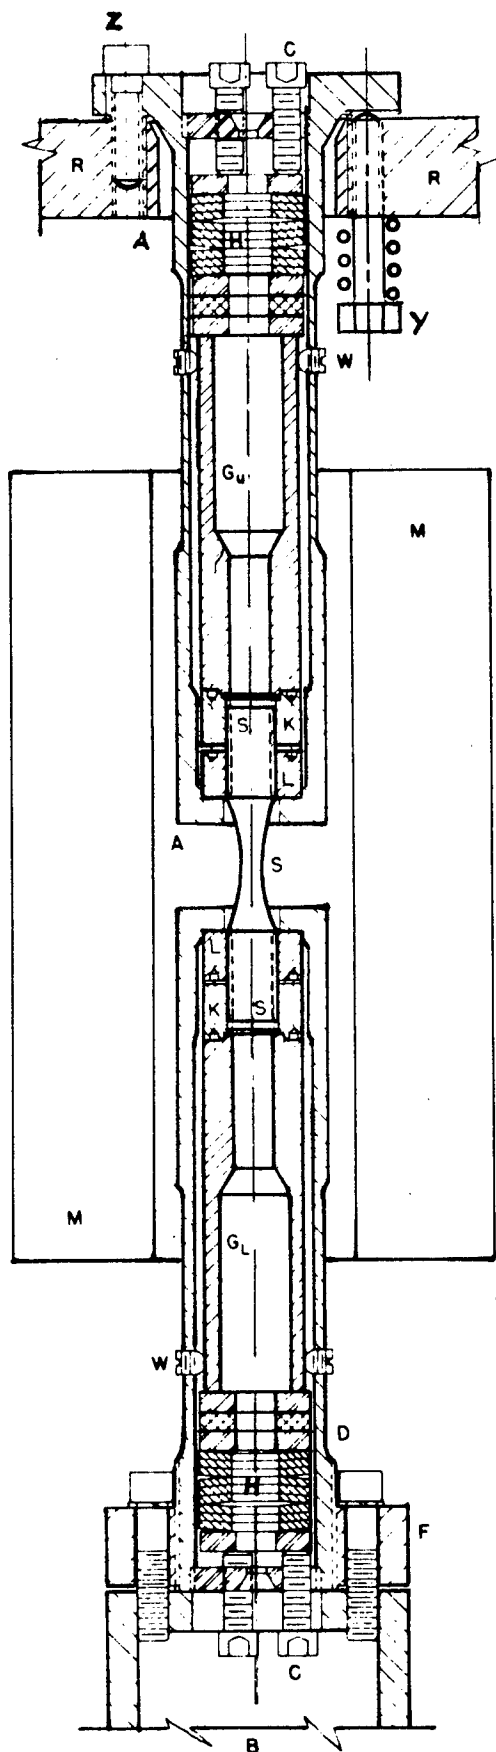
GRIP-SPECIMEN ASSEMBLY IN REVERSED STRESS FATIGUE TESTING
